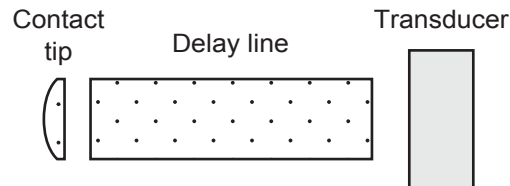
Exploded view showing contact tip and delay line of dabber probe.
